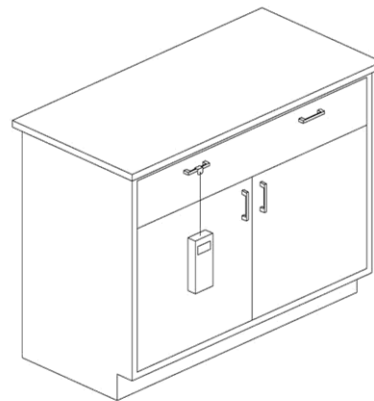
Base Cabinet Door and Drawer Pull Vertical Load Test Configuration
